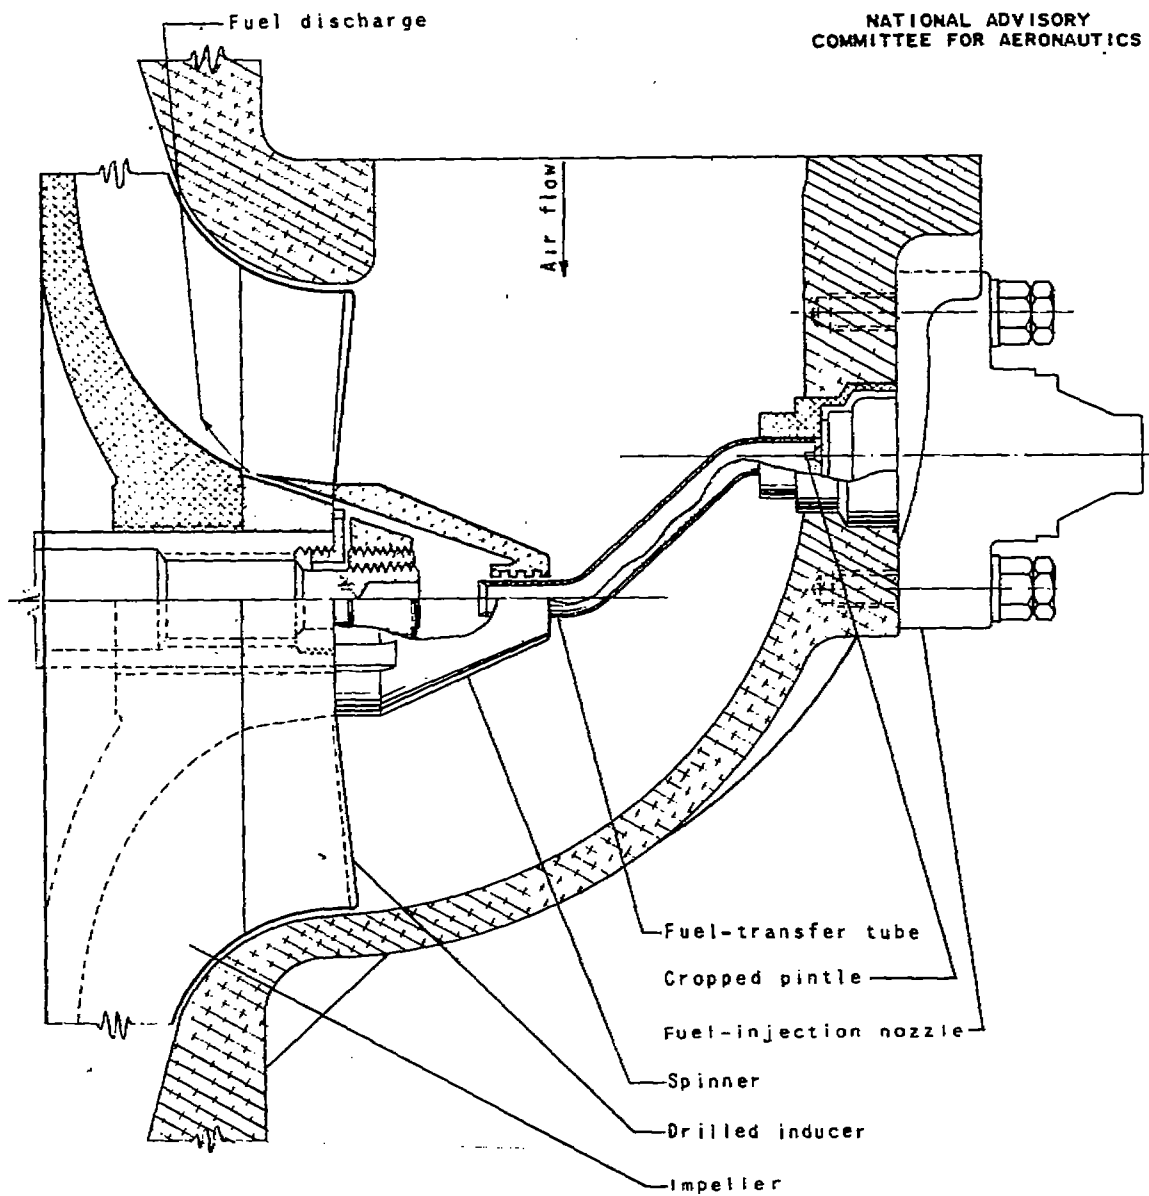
Drilled-inducer fuel-injection system on V-type, liquid-cooled aircraft engine.
